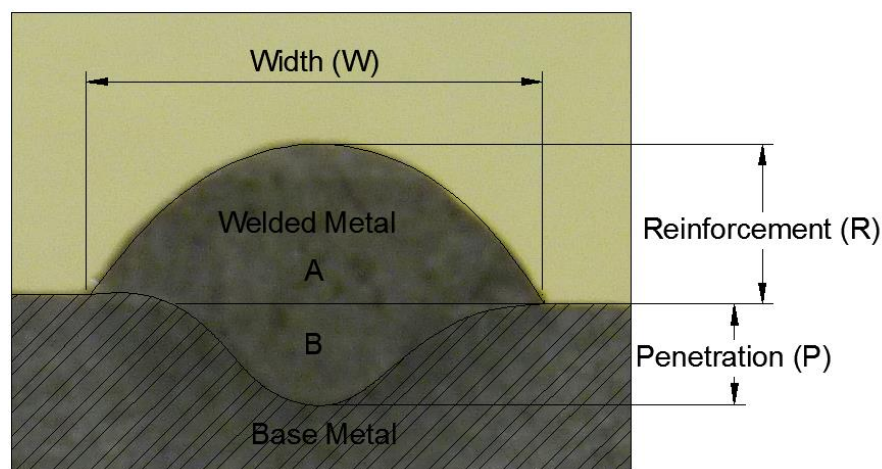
Clad bead geometry. Weld CMT in flat plate
